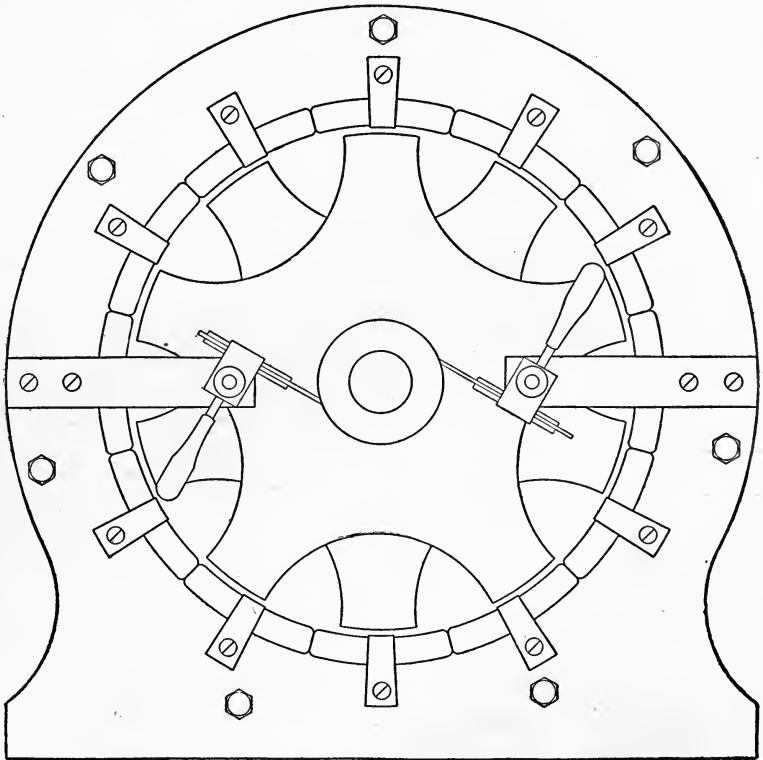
SIDE ELEVATION OF THE MACHINE.
